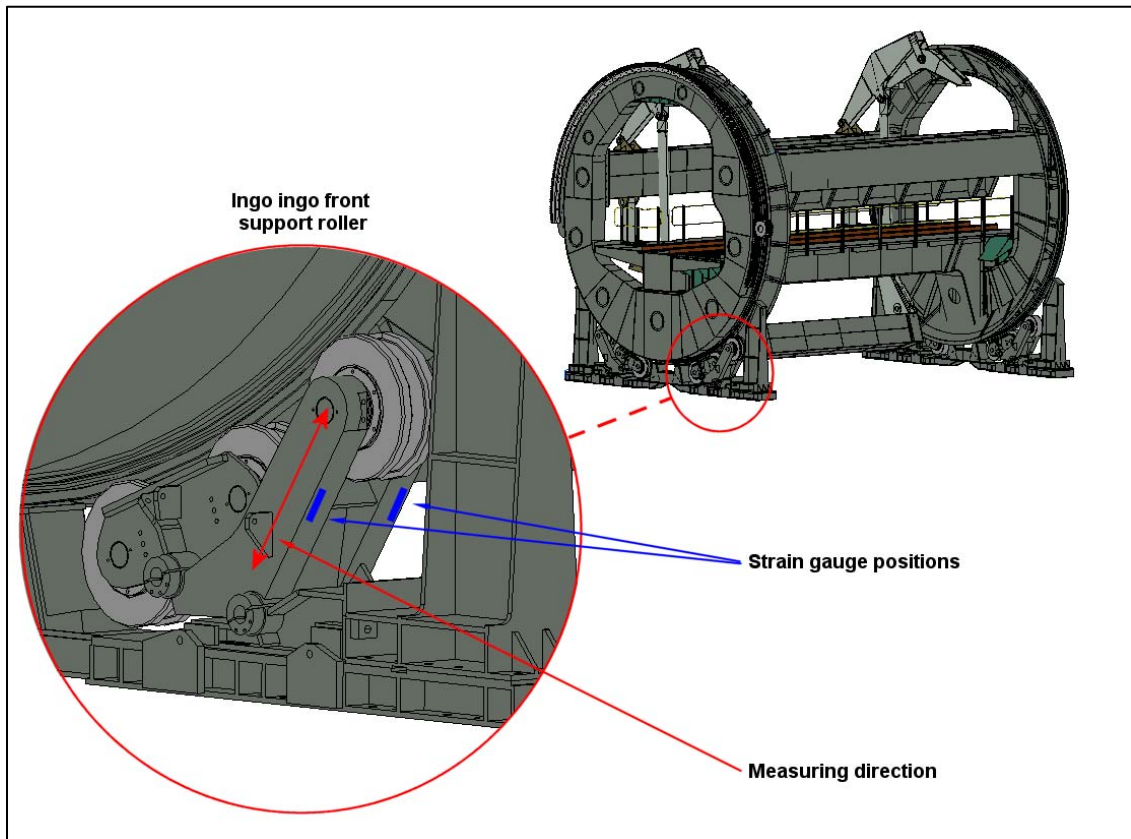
Strain gauge positions on the primary compensating beam of the ingo cage ingo side front support roller
